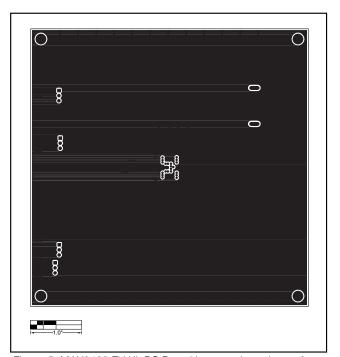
MAX9400 EV Kit PC Board Layout—Inner Layer 2 (GND Layer)
